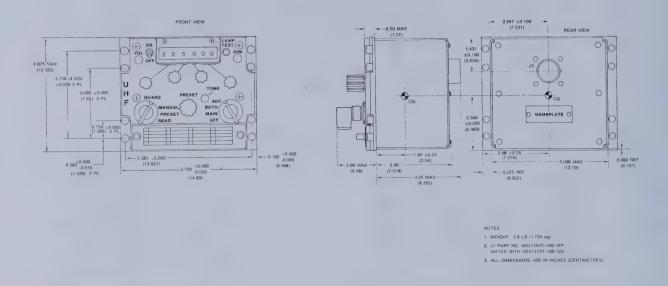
C-9577/ARC-159(V) Control Unit, Outline and Mounting Dimensions
